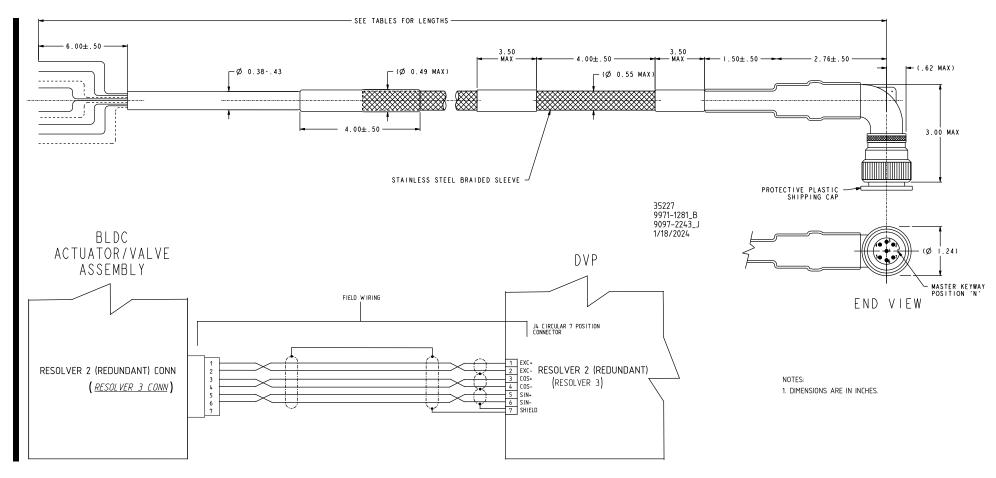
Cable, 7-Pin Actuator Motor Resolver #2 (Redundant)
